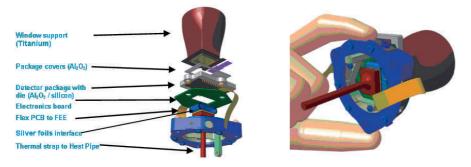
Sentinel-4 FPA designexploded diagram (left) and sizes of the focal plane relative to a hand (right).
